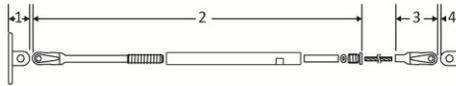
Surface Mount Eye (ref. #1)/FineLine® Jaw Turnbuckle (ref. #2)/FineLine® Jaw Turnbuckle (ref. #3)/Surface Mount Eye (ref. #4)
